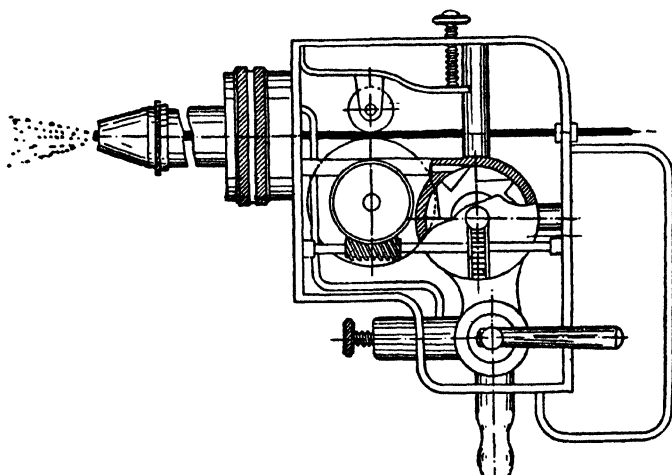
Sectional View of the First Metal-spraying Pistol.
